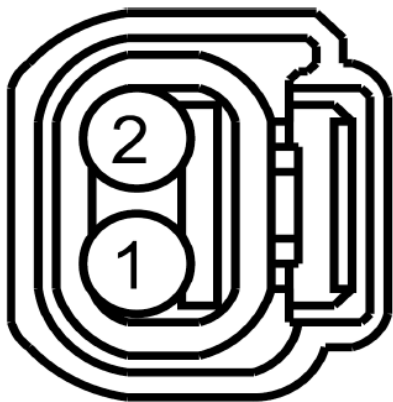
Coil On Plug 2 Connector End View (C1539)
